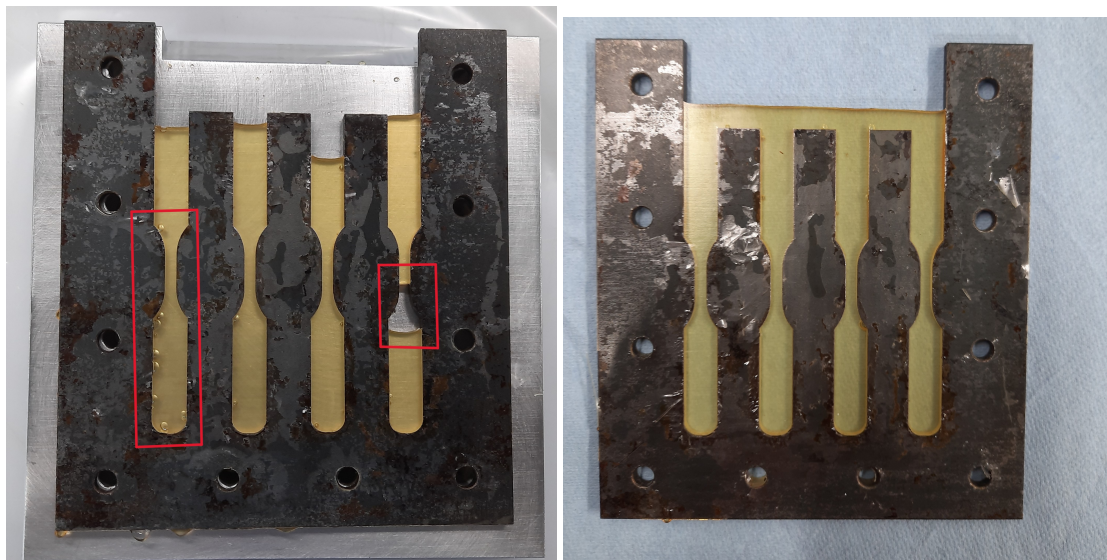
Tensile Specimens Produced with Defects (marked in red) and Good Samples
